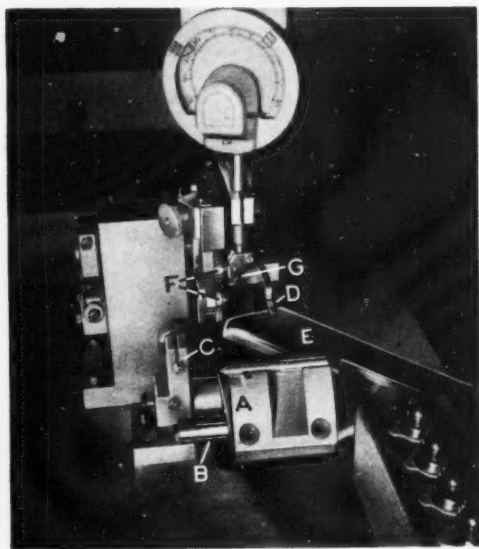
Close-up Front View of the Machine in Fig. 1, Showing the Loading-arm A, and the Gauging Contacts
